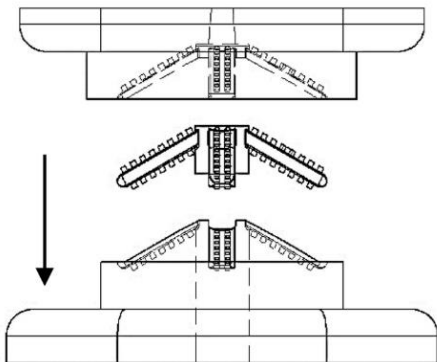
A schematic illustration of the 3D part and mould [51, p.140].
